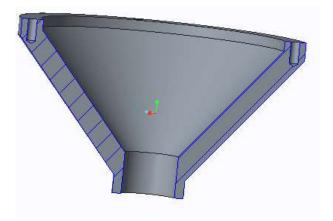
Section where you can see the inner geometry of the hopper of the extruder.
